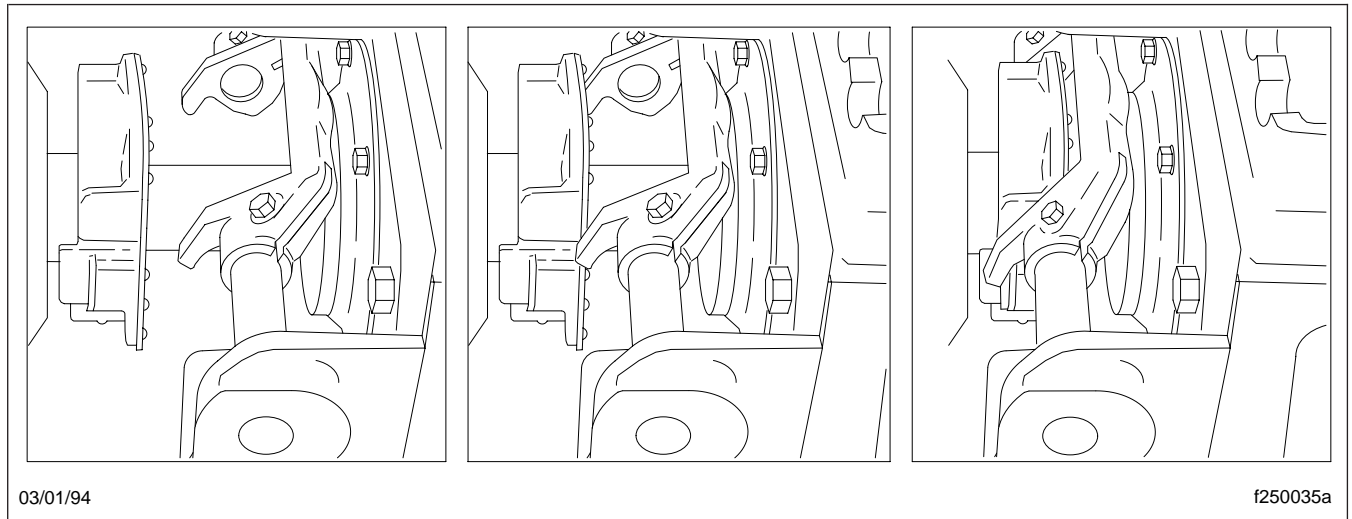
, Make Sure the Release Yoke Clears the Bearing
